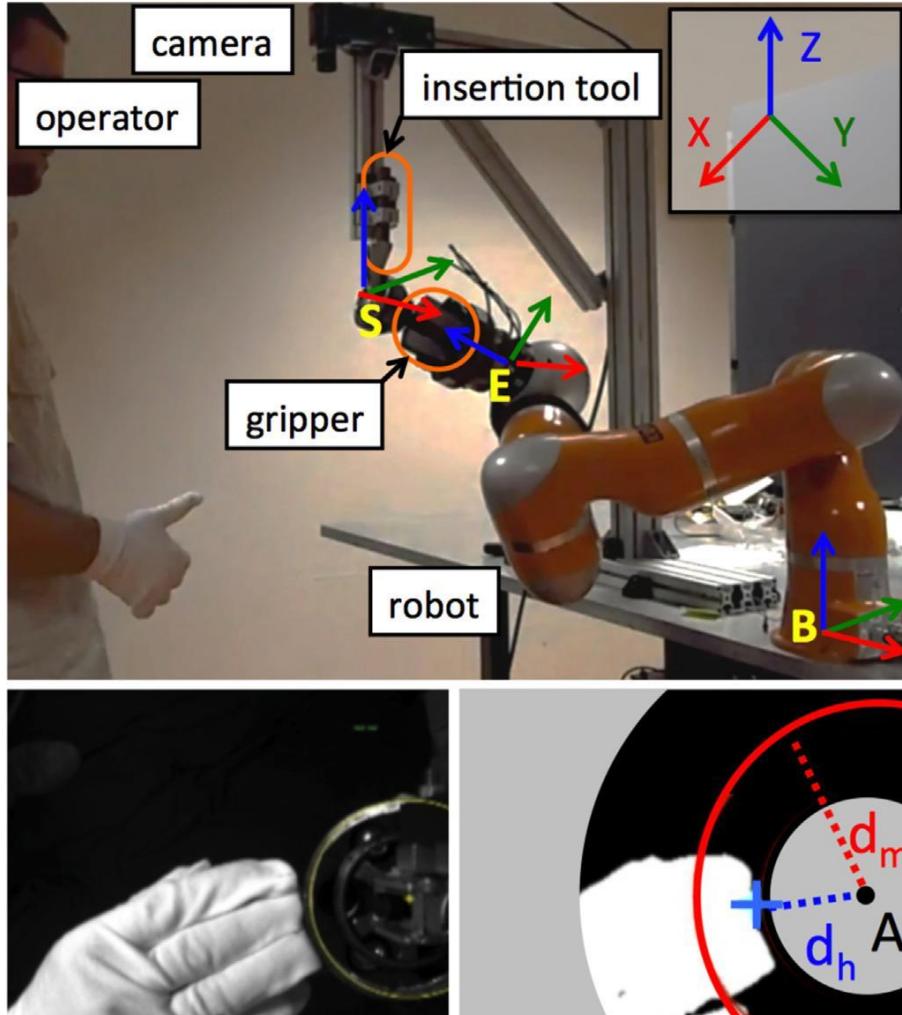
Setup for Rzeppa joint assembly cobot with insertion tool support(S), end effector(E) and robot base(B)
